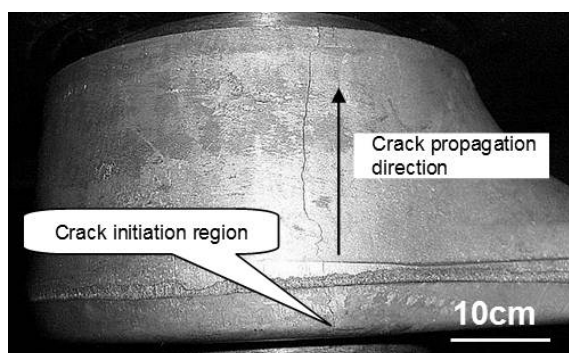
Fracture appearance of the rod with the load of 52 kN.
